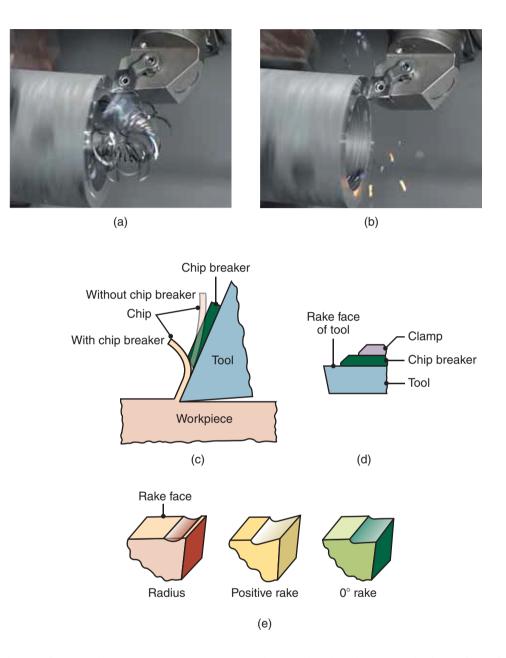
(a) Machining aluminum using an insert without a chip breaker; note the long chips that can interfere with the tool and present a safety hazard. (b) Machining aluminum with a chip breaker. (c) Schematic illustration of the action of a chip breaker; note that the chip breaker decreases the radius of curvature of the chip and eventually breaks it. (d) Chip breaker clamped on the rake face of a cutting tool. (e) Grooves in cutting tools acting as chip breakers; the majority of cutting tools are now inserts with built-in chip-breaker features. *Source:* (a) and (b) Courtesy of Kennametal, Inc.
